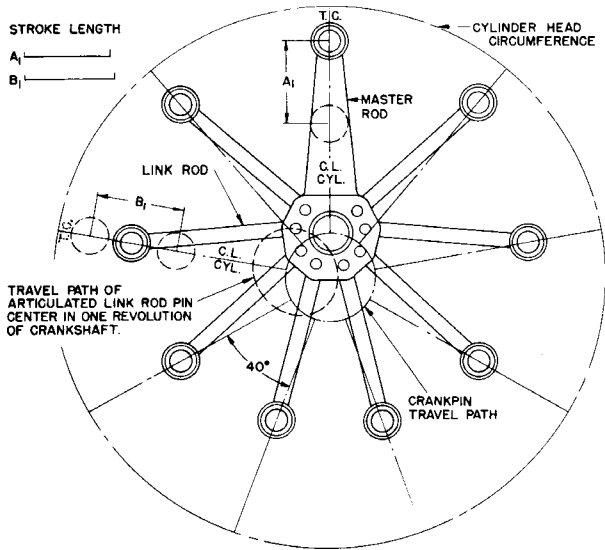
Radial Engine Crankshaft Showing Master/Articulated Rod Construction (Pratt & Whitney)
